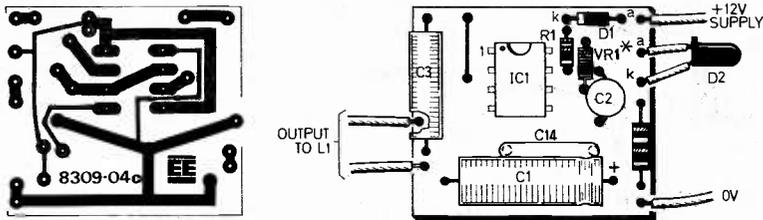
The full-size artwork and component layout of the battery charger p.c.b. This fits into a small enclosure into which D2 is mounted.
